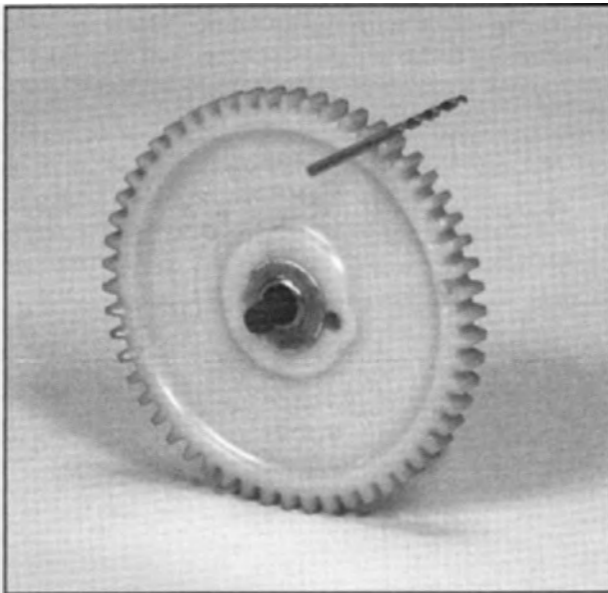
To check for excessive wear between distributor gear teeth, insert a specific size drill bit between the teeth. If the bit fits snugly, the gear is within specifications.
